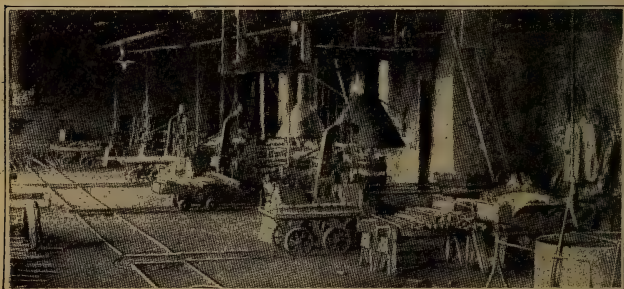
Quincey Mining Company's Drill Shop at Hancock, Mich.; Equipped with Four Standard Drill-Making and Sharpening Machines.
